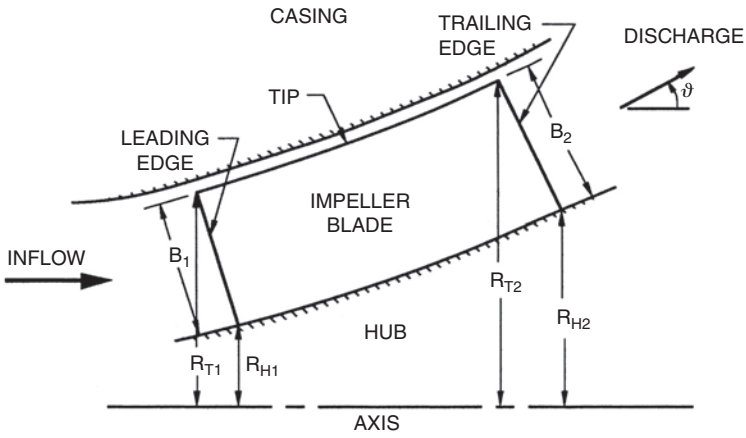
Cross-sectional view through the axis of a pump impeller.
